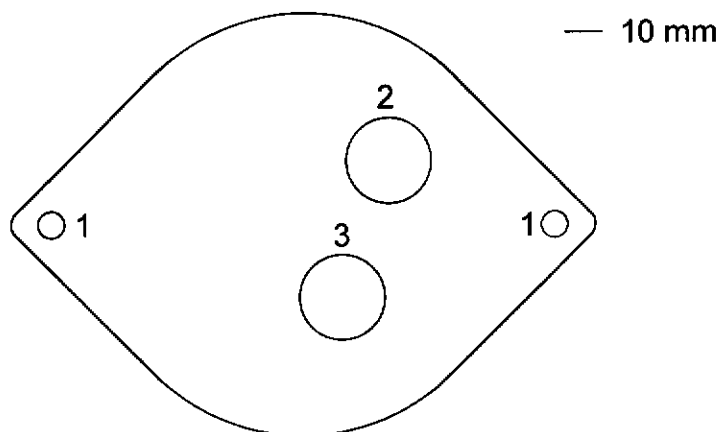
Cross sectional-view, dimensional drawing of the reactor vessel and lid with its clamping mechanism.
